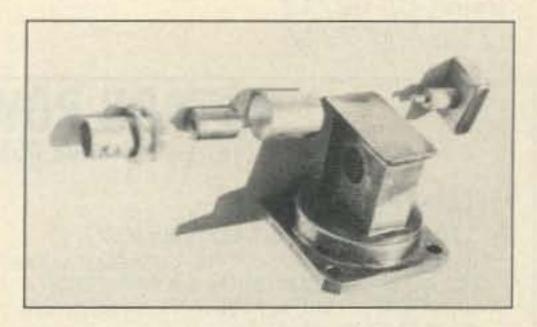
Photo A. Pre-assembly of detector mount with modified top section. Brass tube is soldered over the large hole on top of the waveguide. BNC nut is then soldered to the top of the brass tube.
